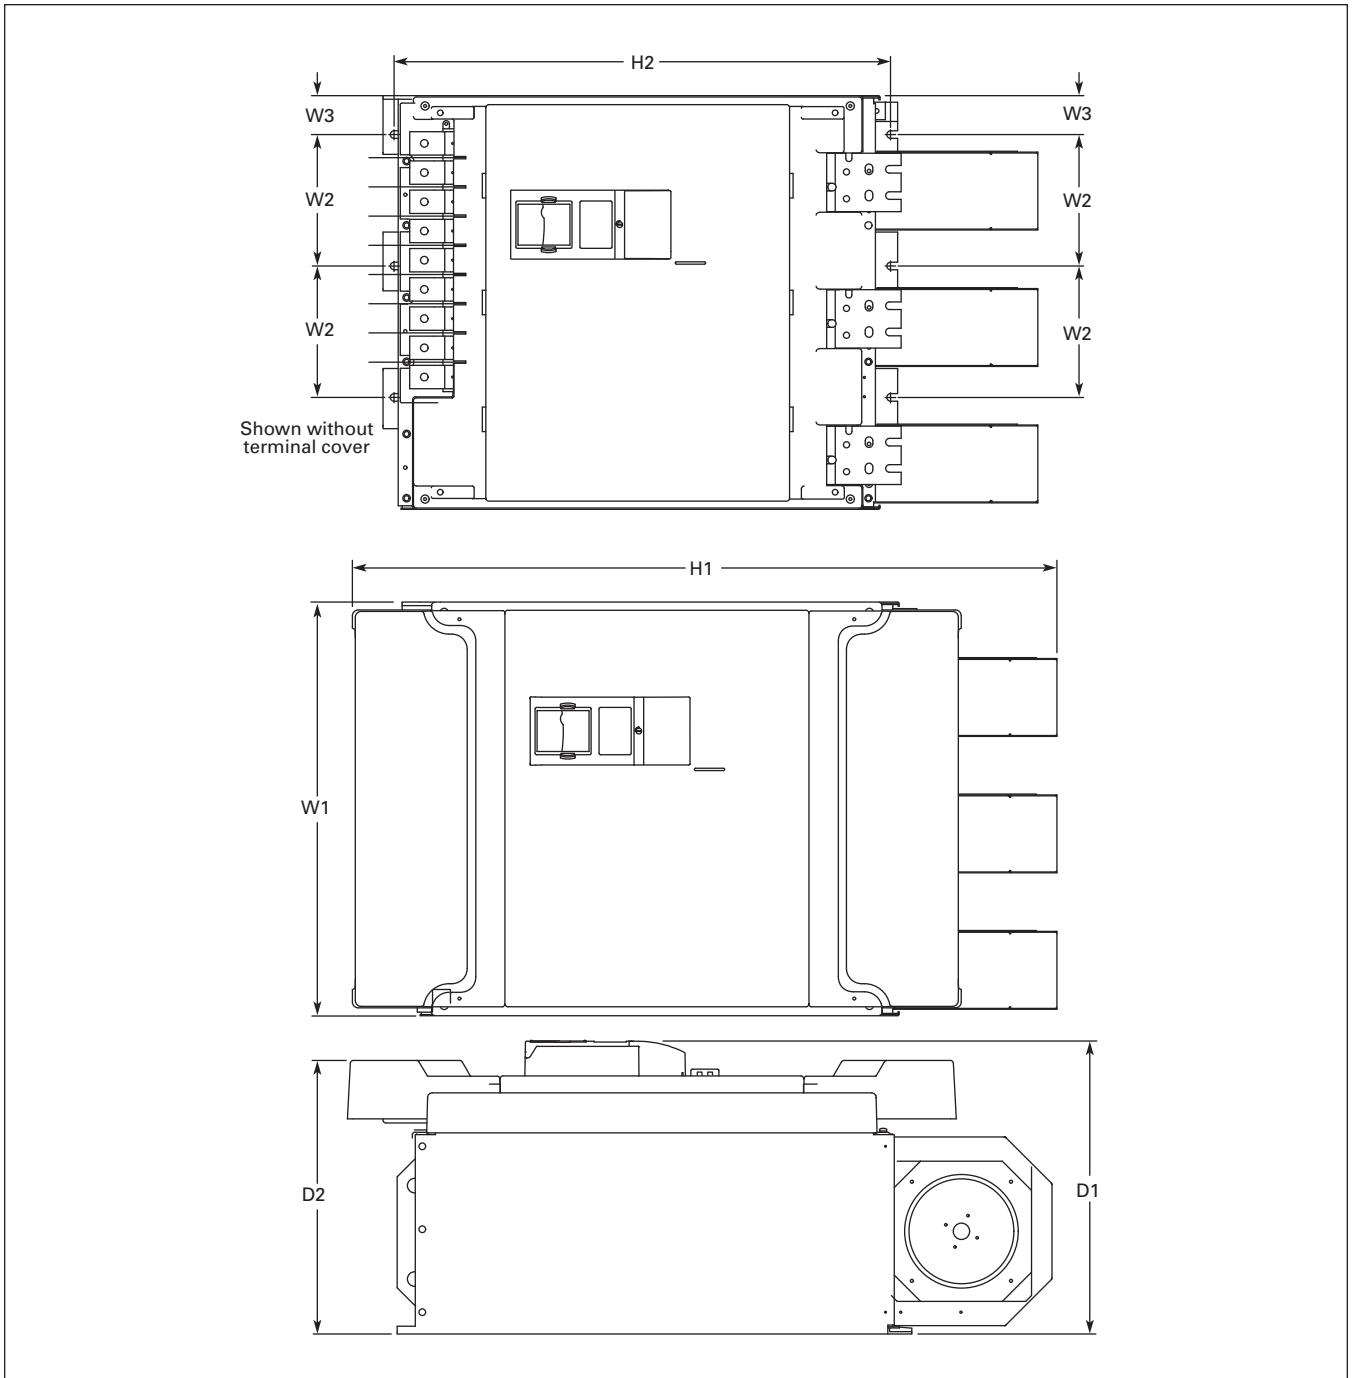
9000X Dimensions, FR11 Open Chassis
